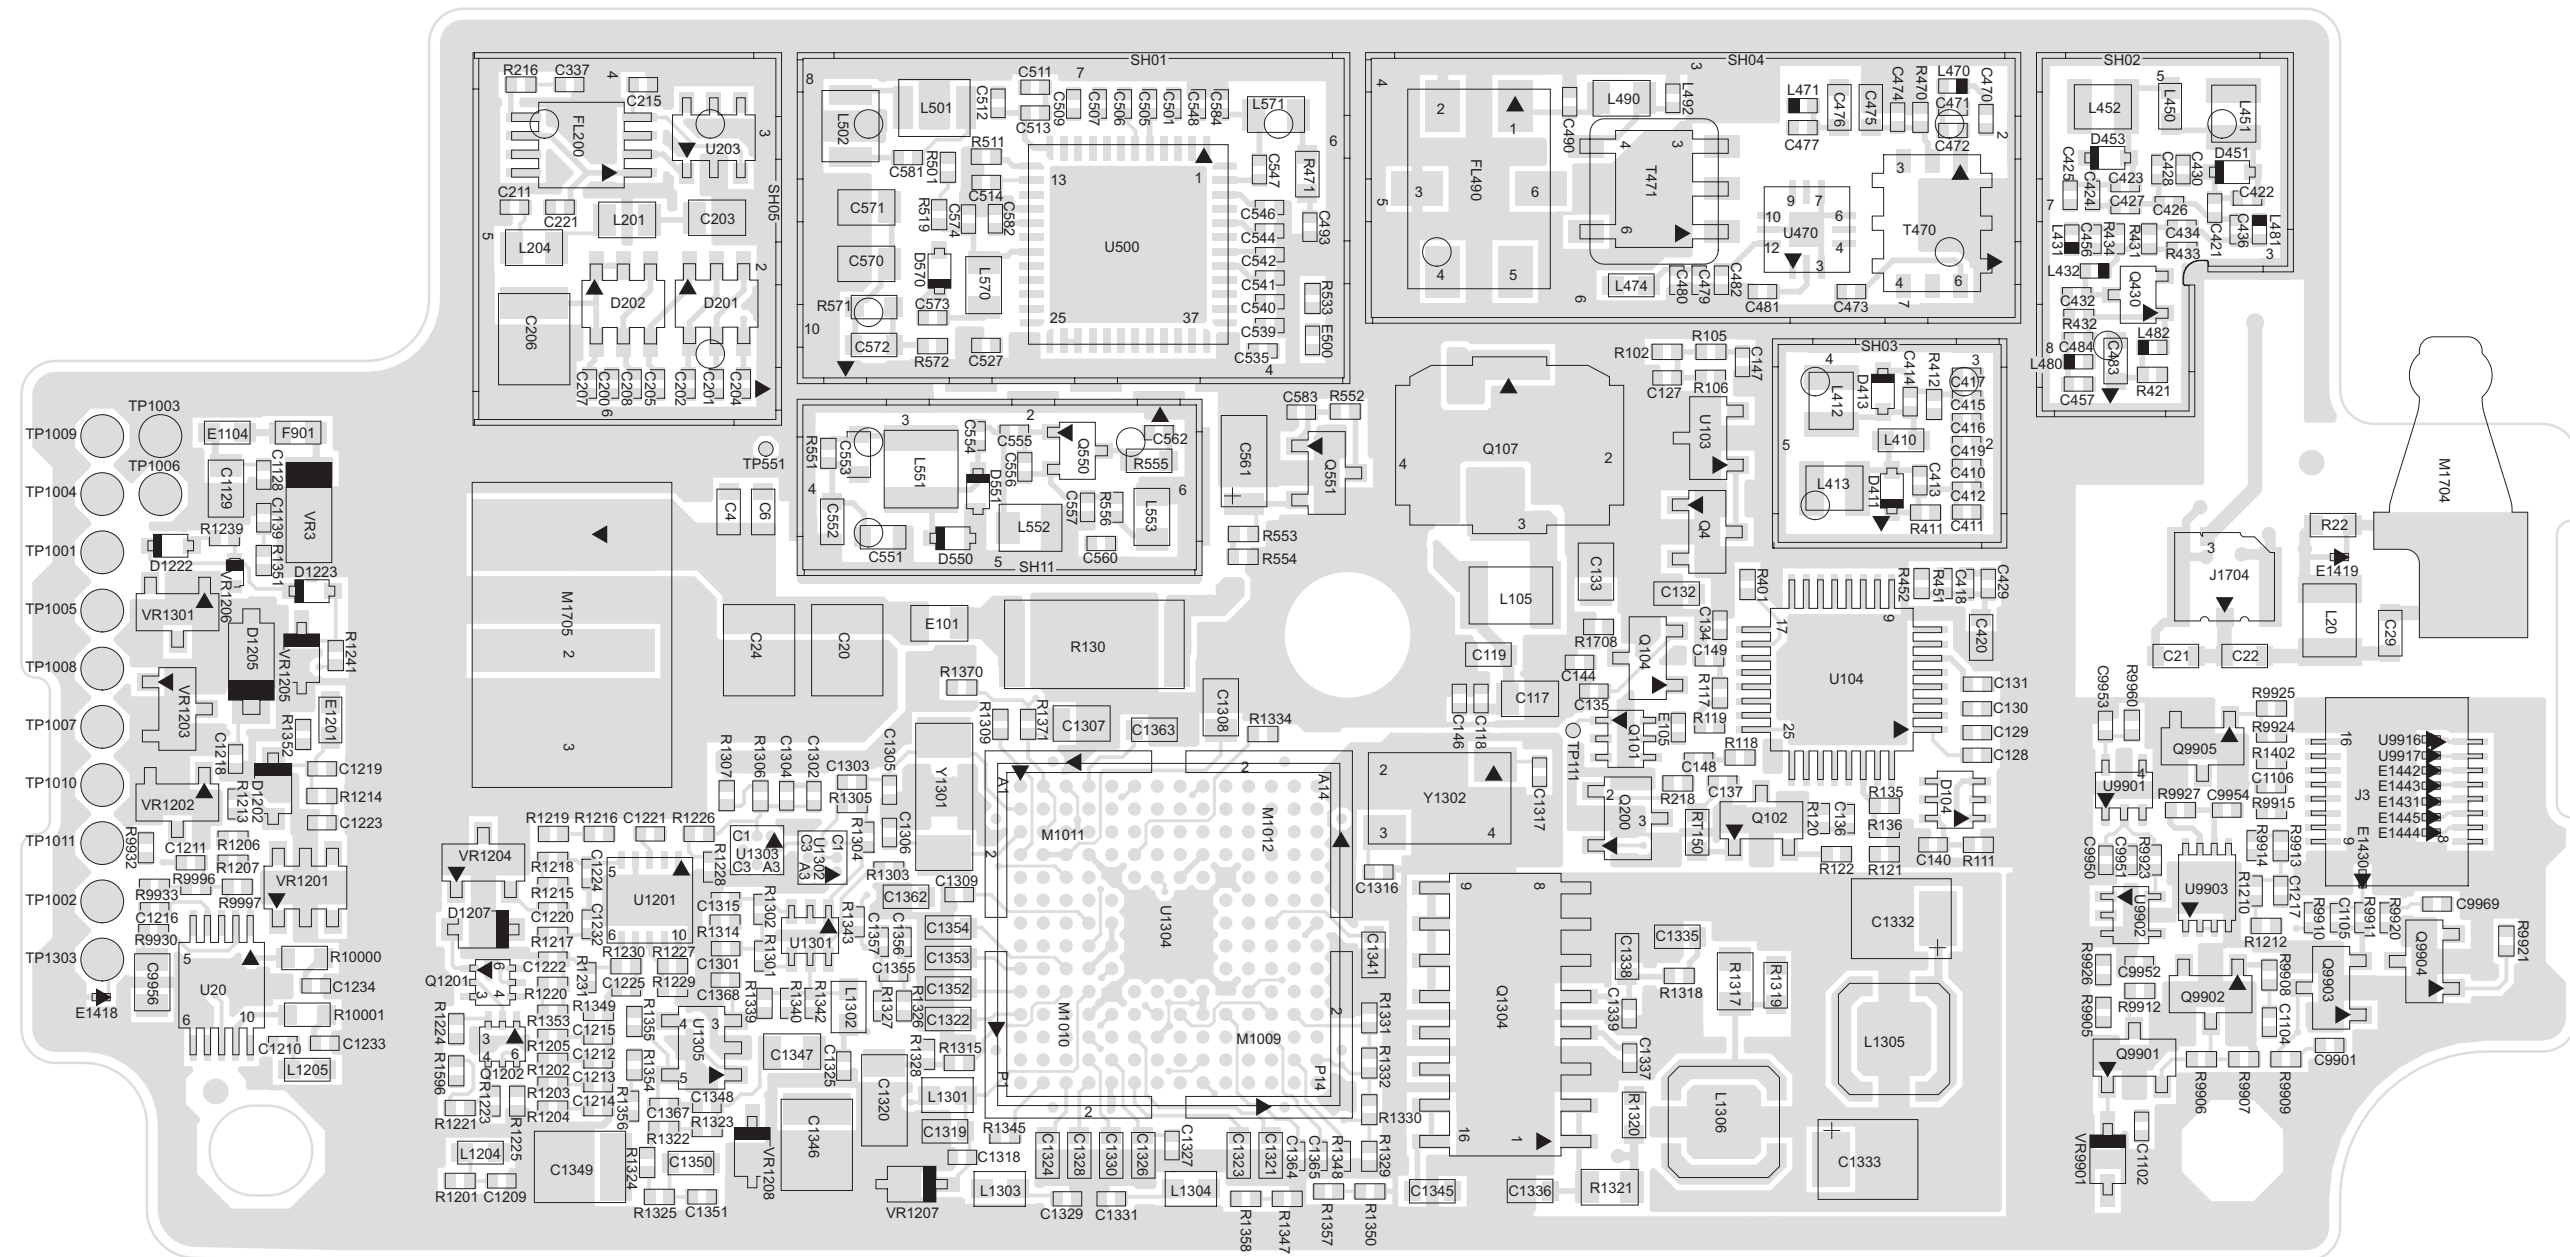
Main Board Layout (NUE7350A/B) – Side 2
